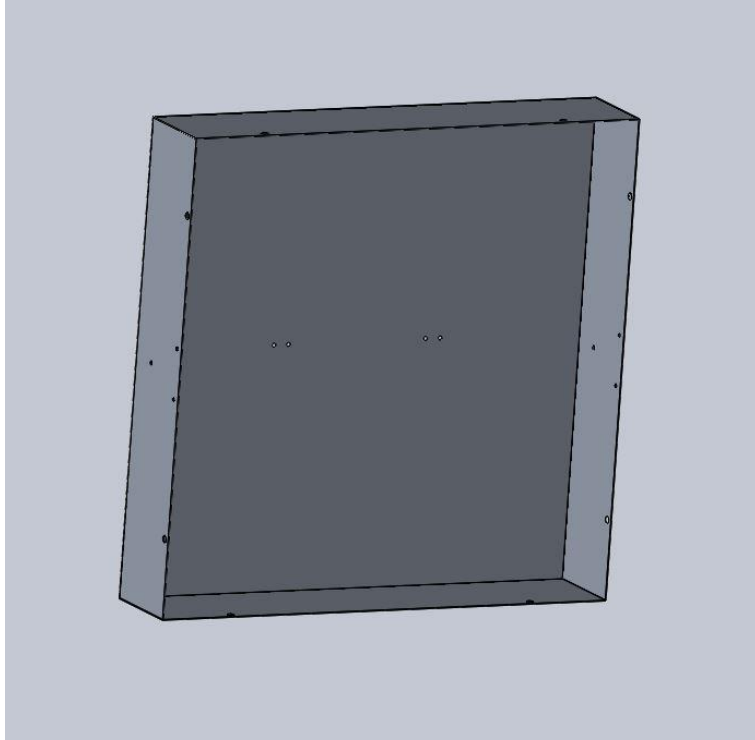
Back of the drawer which fully encompasses the wool insulation on the back of the drawer.
